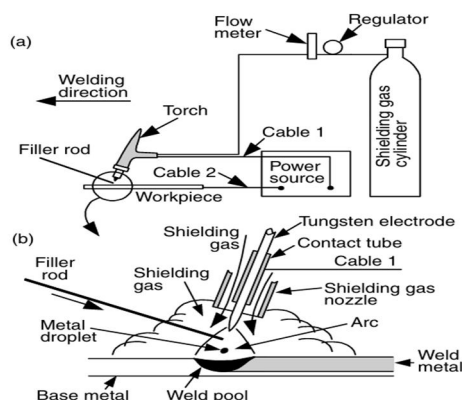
Gas–tungsten arc welding: (a) overall process; (b) welding area enlarged.
